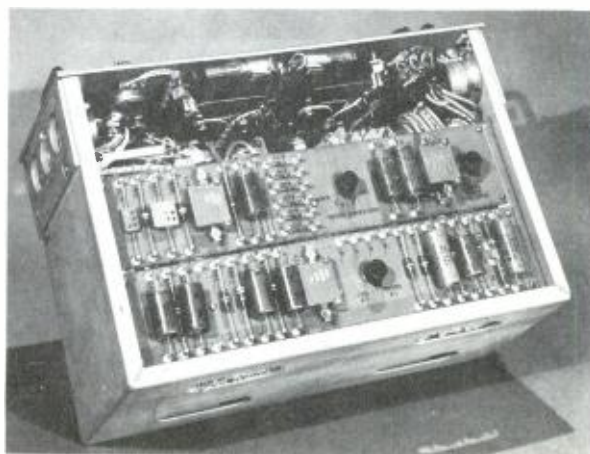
Example of terminal board construction in a finished professional unit. (Courtesy E. R. P. Div'n, Western Electric Co.)
